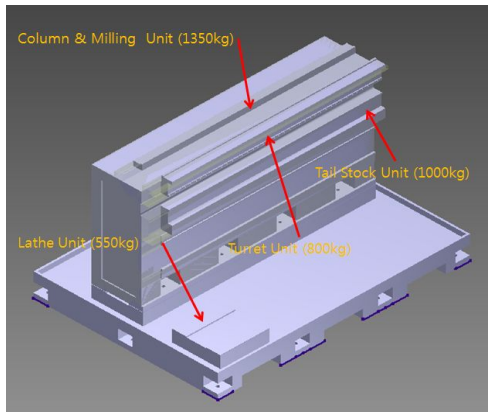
Beds Shape of Multi-Tasking Machine for Automotive Power Train Shafts
